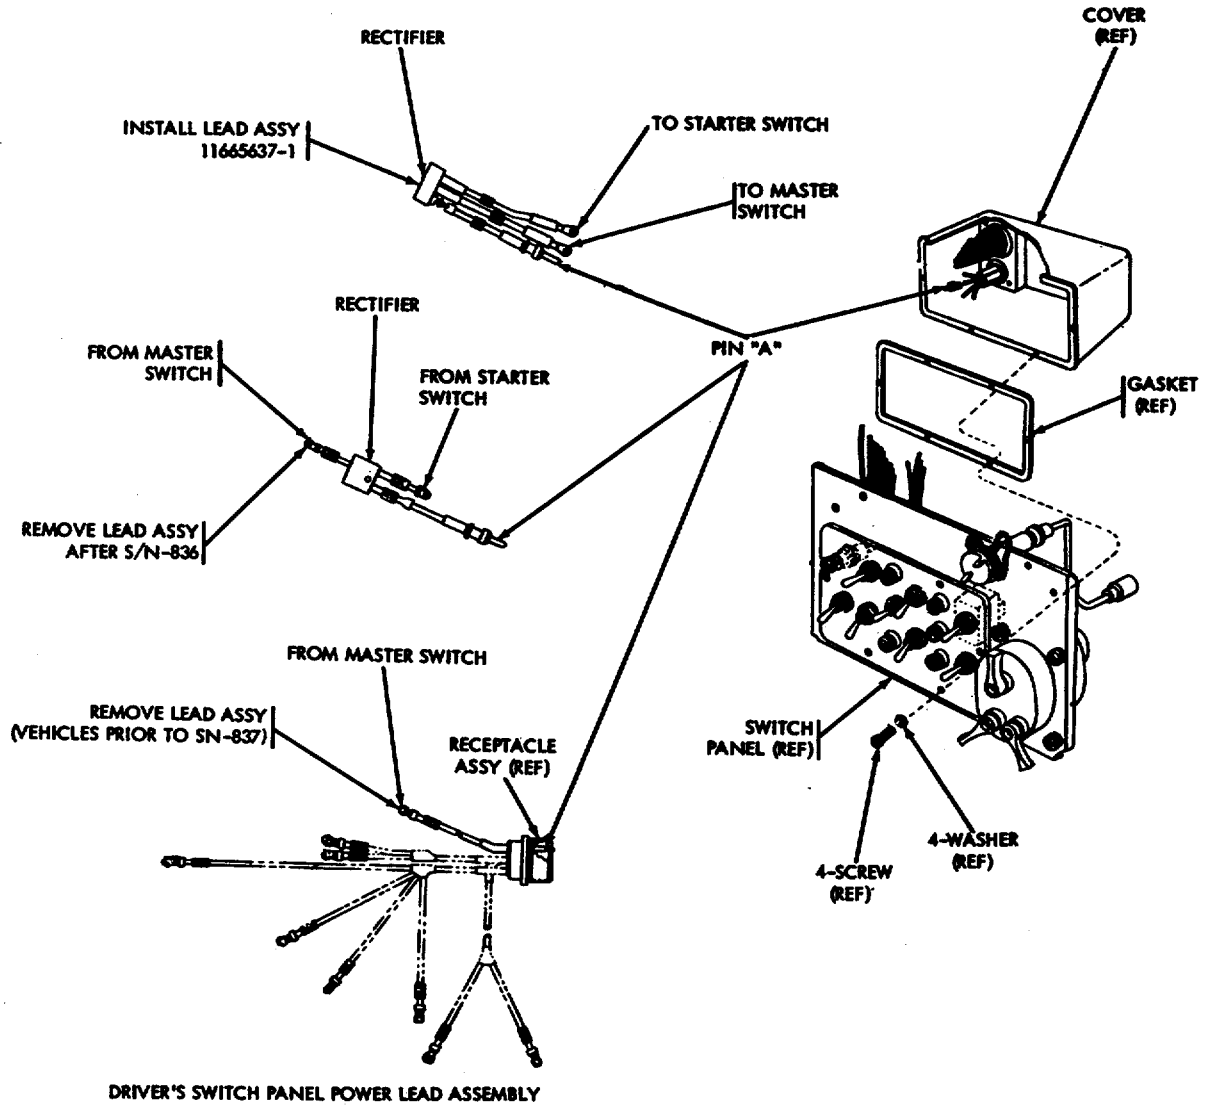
(Superseded) Disassembly/assembly - driver's switch panel (2 of 2)
